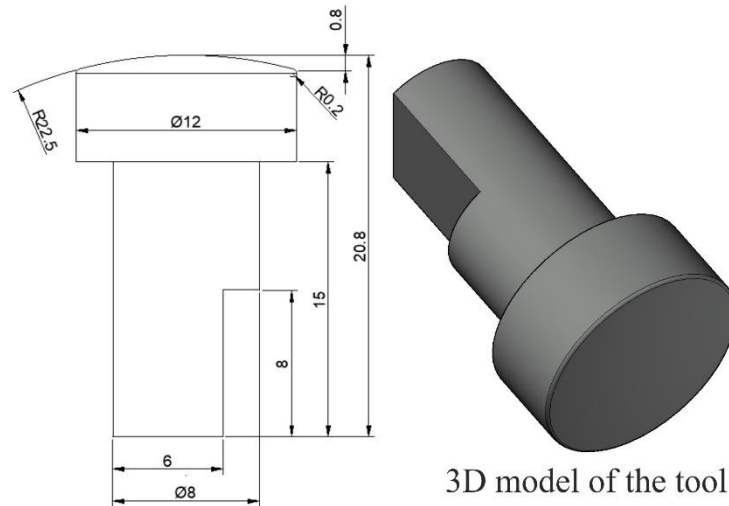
Details of pinless tool geometry used for the friction stir spot welding.
